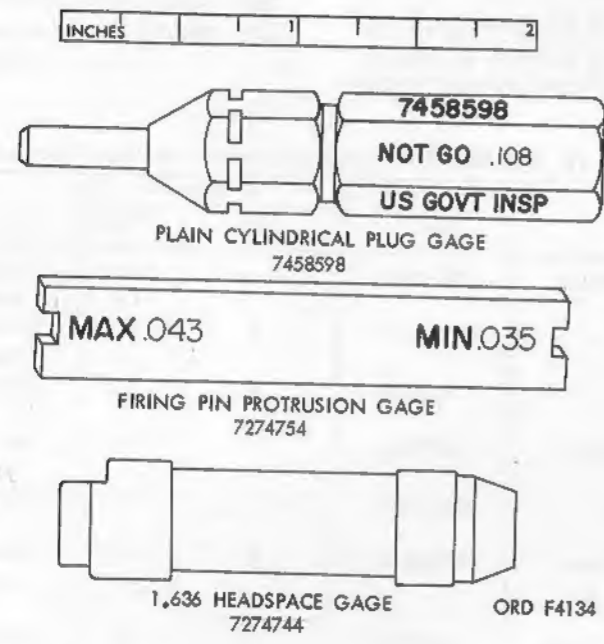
Firing pin protrusion gage 7274754, plain cylindrical plug gage 7458598, and headspace gage 7274744.
